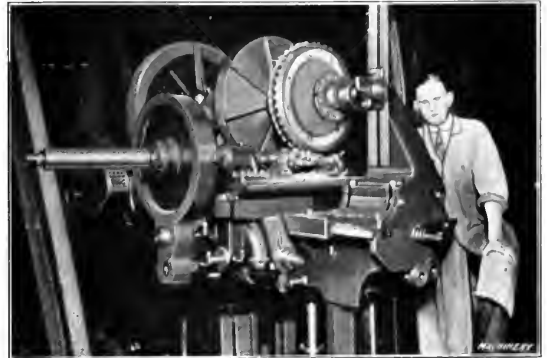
Machine used for cutting Straight Worm-wheels using Tapered Hobs
